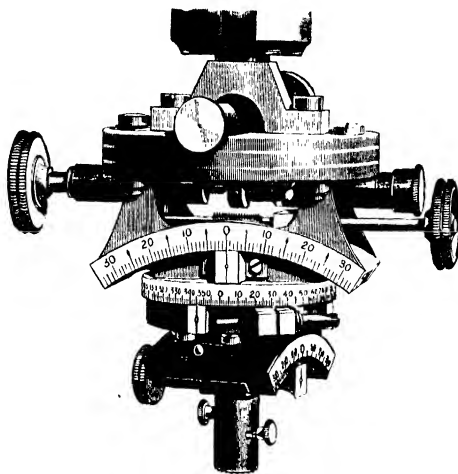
Special Crystal-adjusting Movements of Cutting and Grinding Goniometer.
